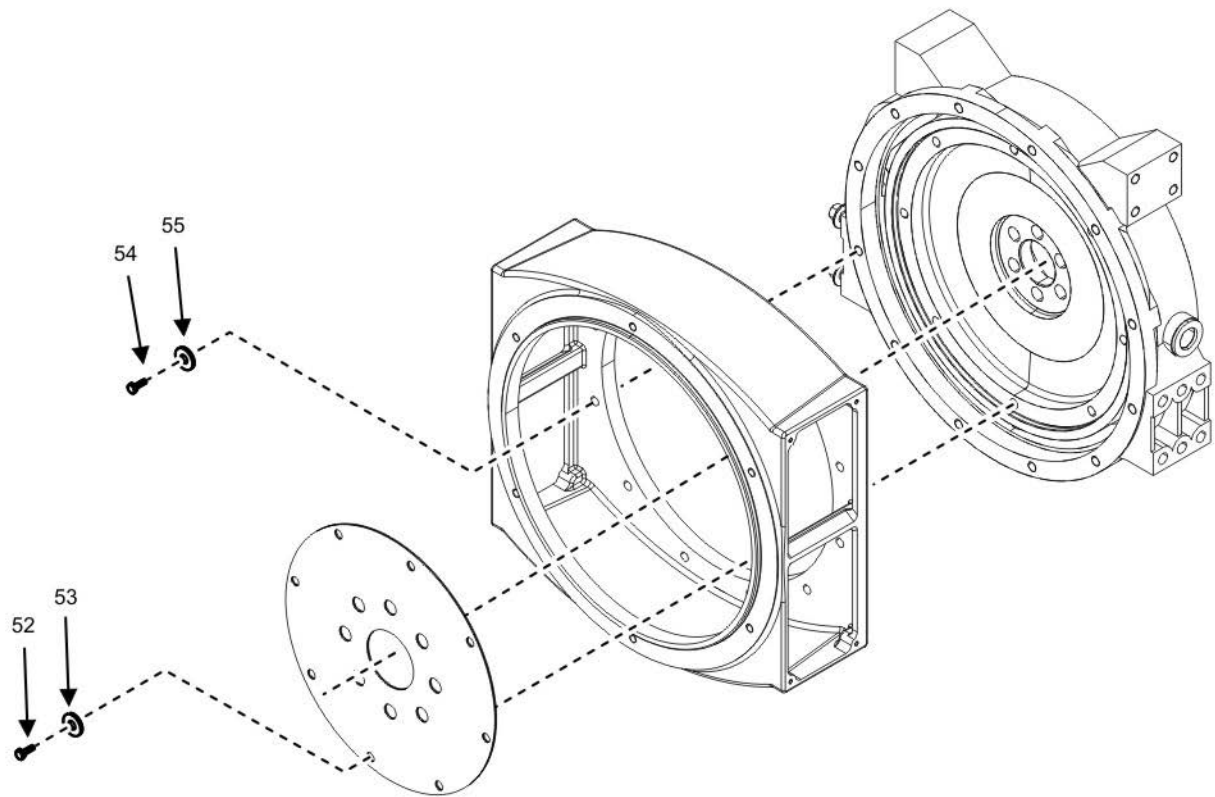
AC Generator Assembly, 50/60 Hz (Sheet 5 of 5).
